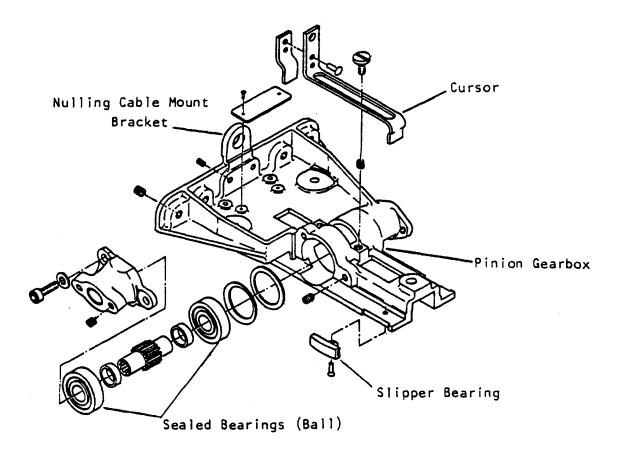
Pinion Gearbox Assembly (Inboard Shown)
